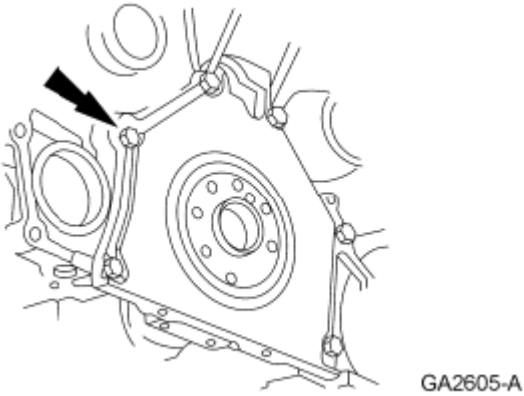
Locating Crankshaft Rear Seal Retainer Plate And Bolts
